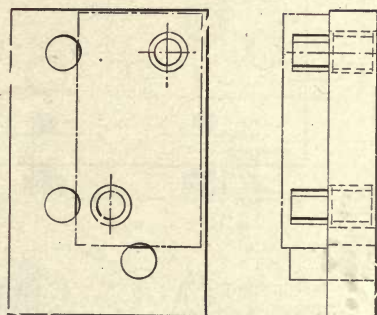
First Improvement on Plate Jig: Locating Pins Inserted
